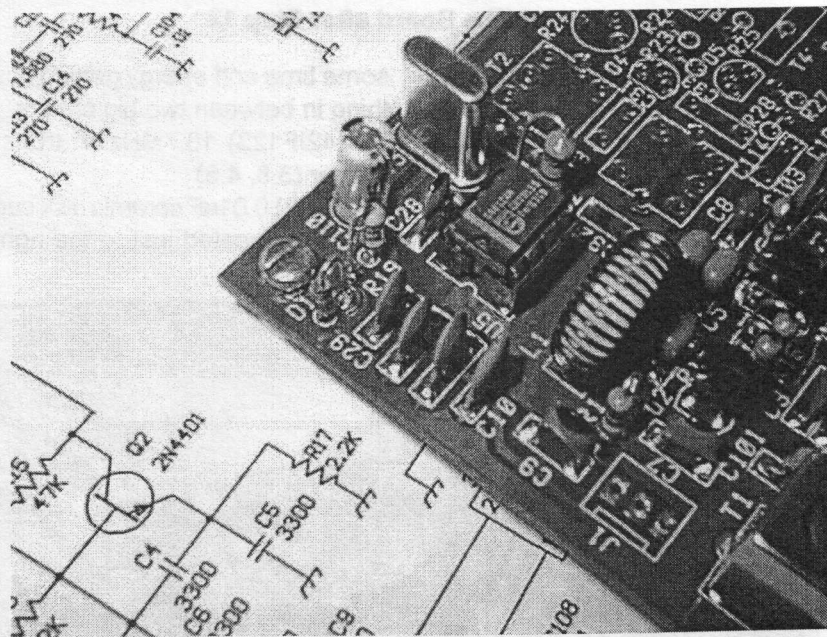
Picture of the board showing the transmitter mixer area wired up.
